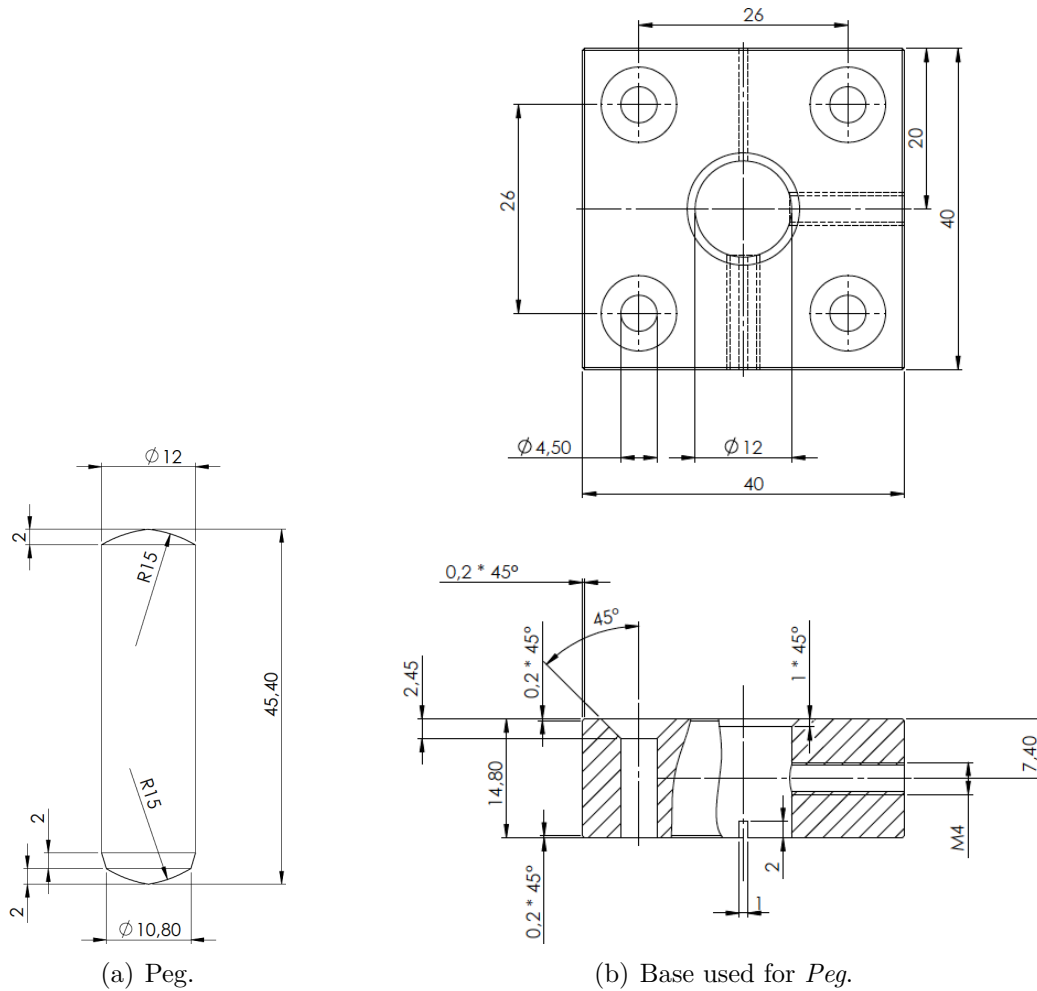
Engineering drawings of a peg and a plate with a hole. Both are used for the assembly task *Peg*.
